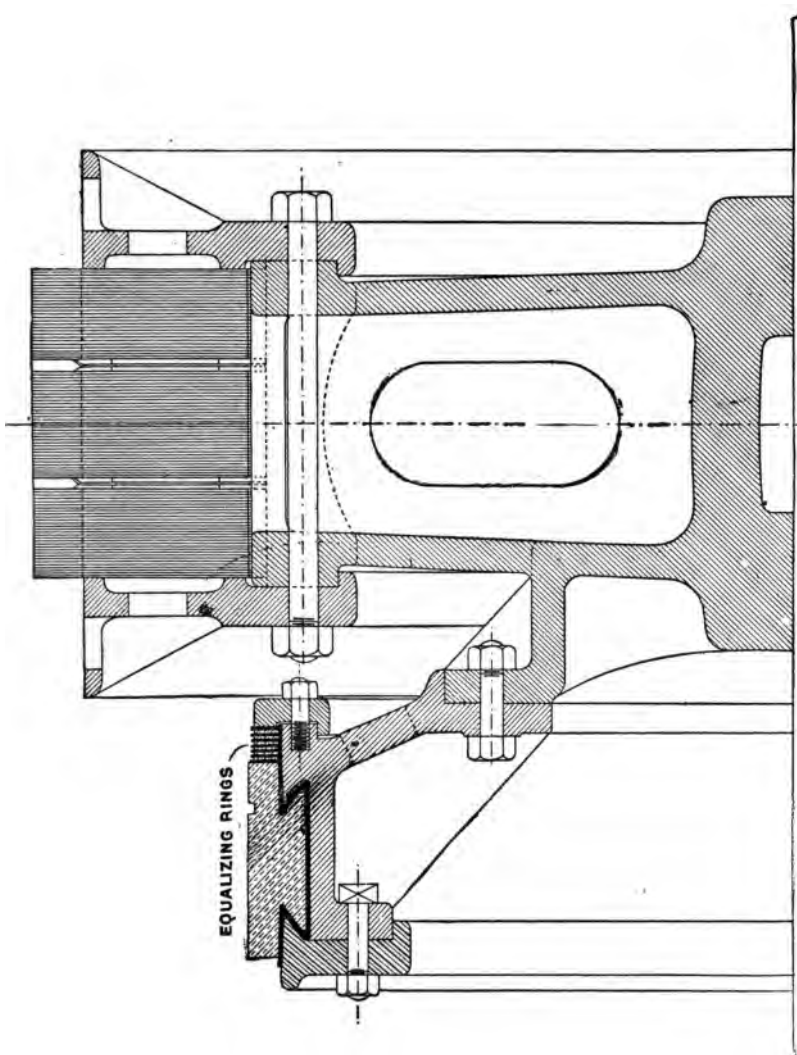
SCOTT AND MOUNTAIN MP 12—280—90, SHOWING EQUALIZING RINGS.
